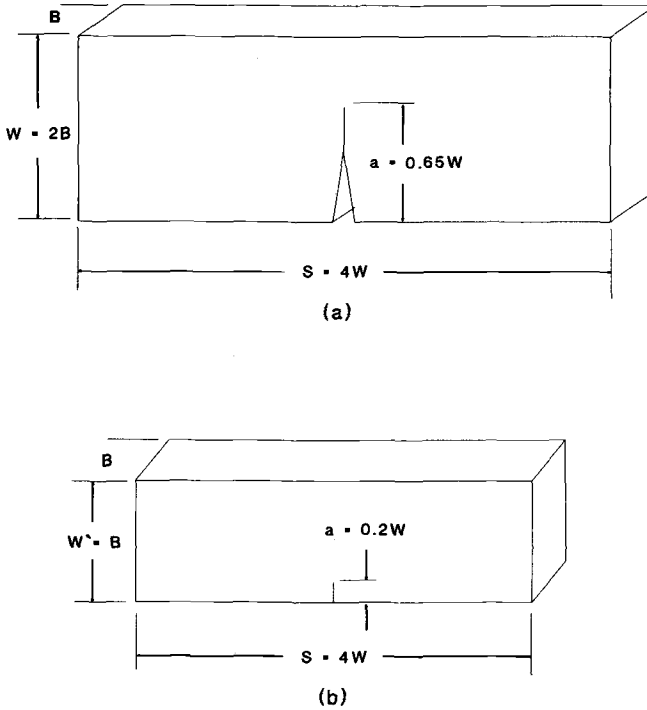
SE(B) specimens; (a) deep crack; (b) shallow crack.
